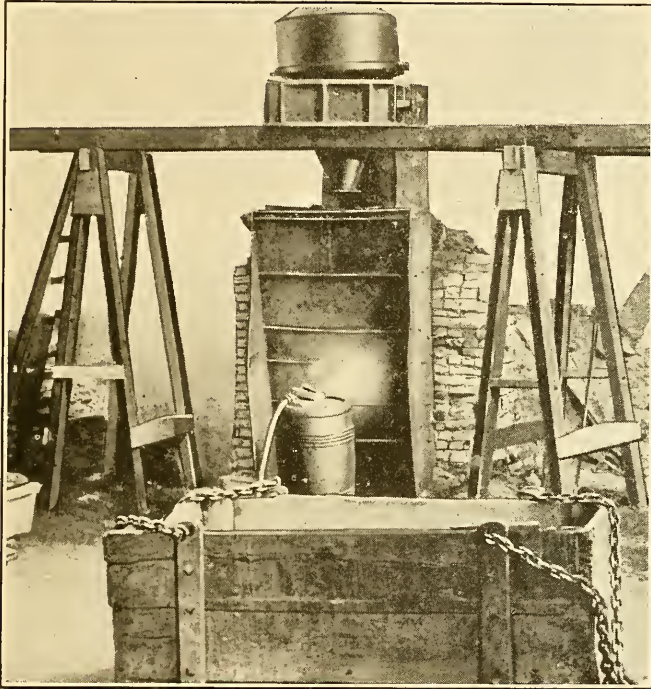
Mold Box, Brick Furnace and Crucible in Position and Pinion Being Preheated.
